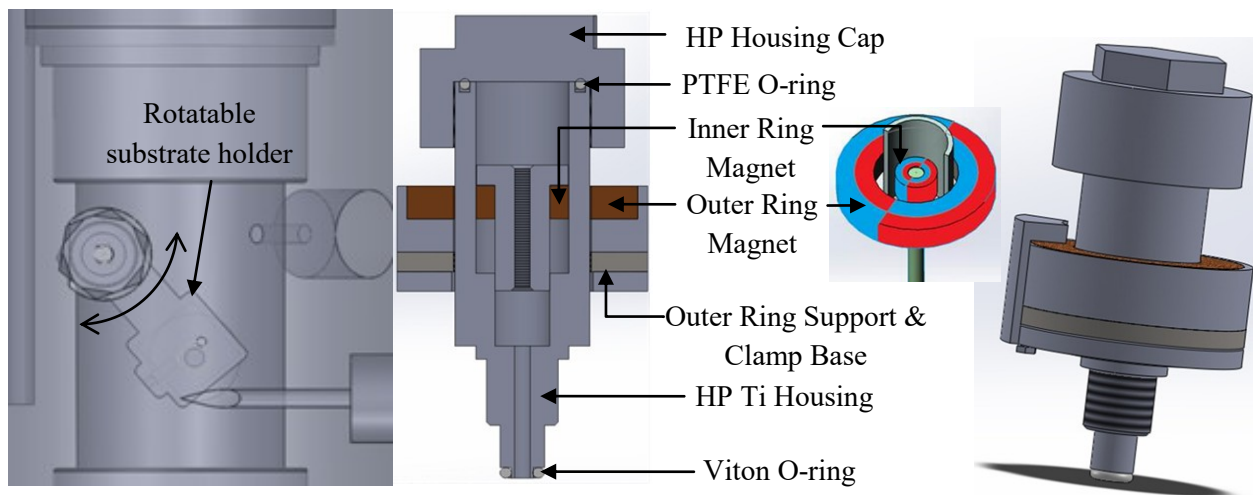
Left.* Bird's-eye view of substrate holder positioning inside the view cell. *Centre.* Cross-section of the substrate adjuster, showing the magnetic coupling. *Right.* SolidWorks model of the substrate adjuster assembly.
